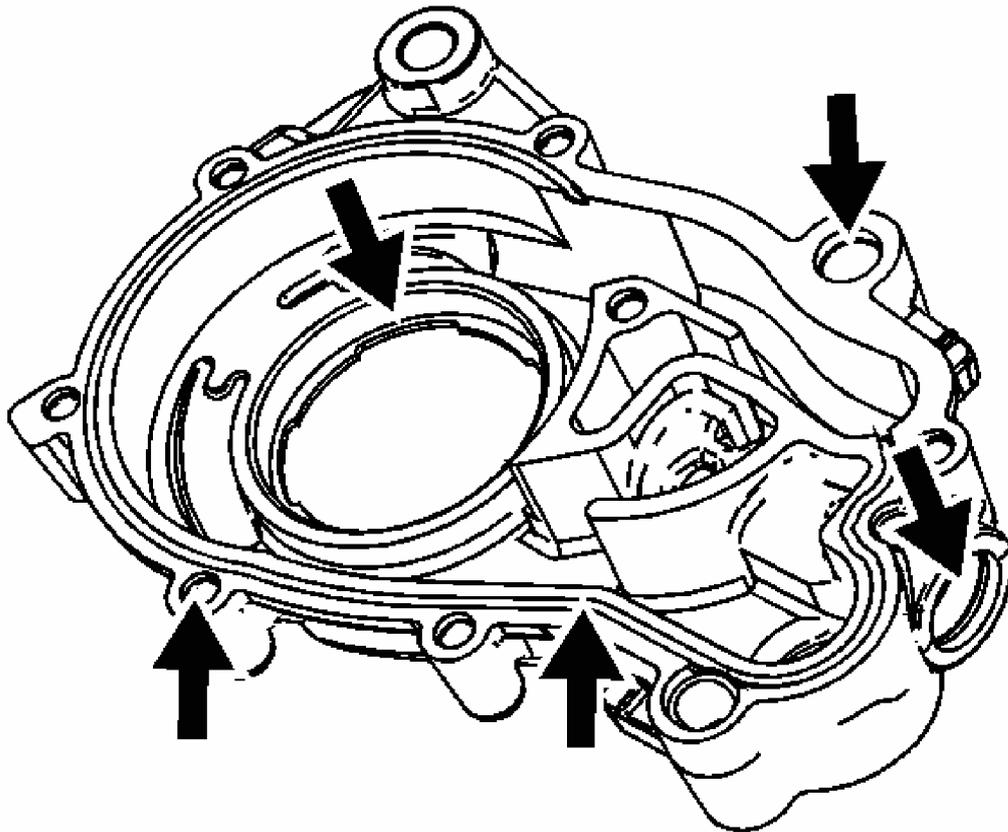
Identifying Oil Pump Housing Inspection Areas
